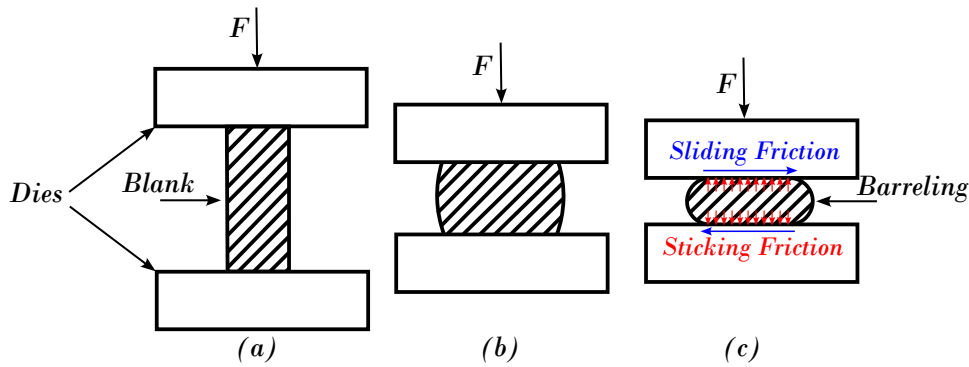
Open-die forging process, (a) Forging start, (b) Forging in process, (c) Forging finish, highlighting frictional forces and barreling effect, adapted from Chandrasekaran *et al.* [124].
